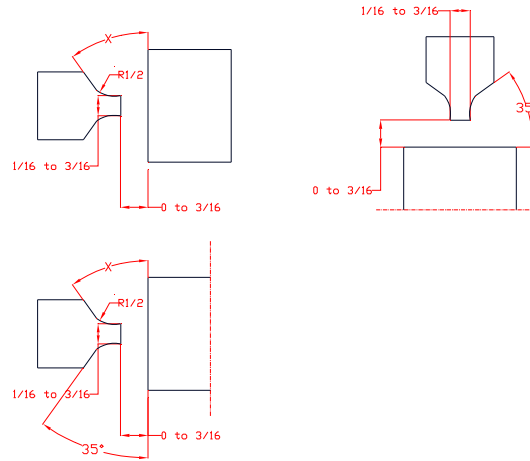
Single-J groove joints for welding one or both sides.
